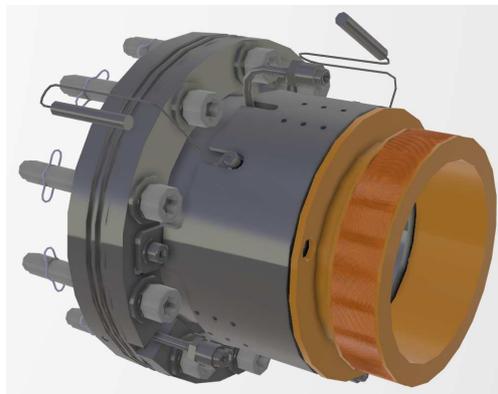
CAD model of magnetic sensor (orange) mounted on ITER window assembly.
